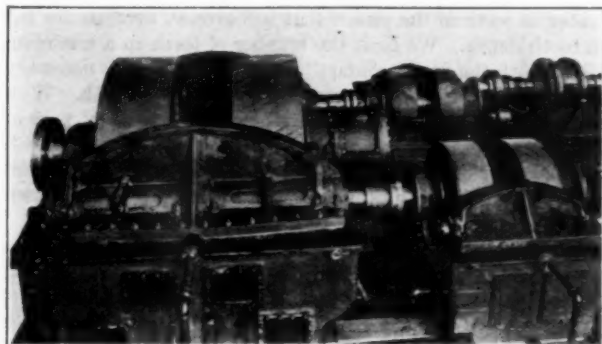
5500-S.H.P. MARINE REDUCTION GEAR
